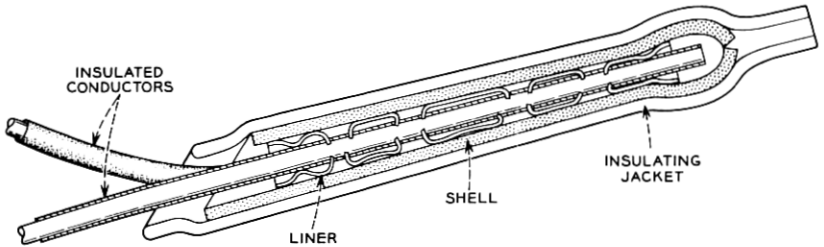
B Wire Connector — cross section after pressing on wires.
